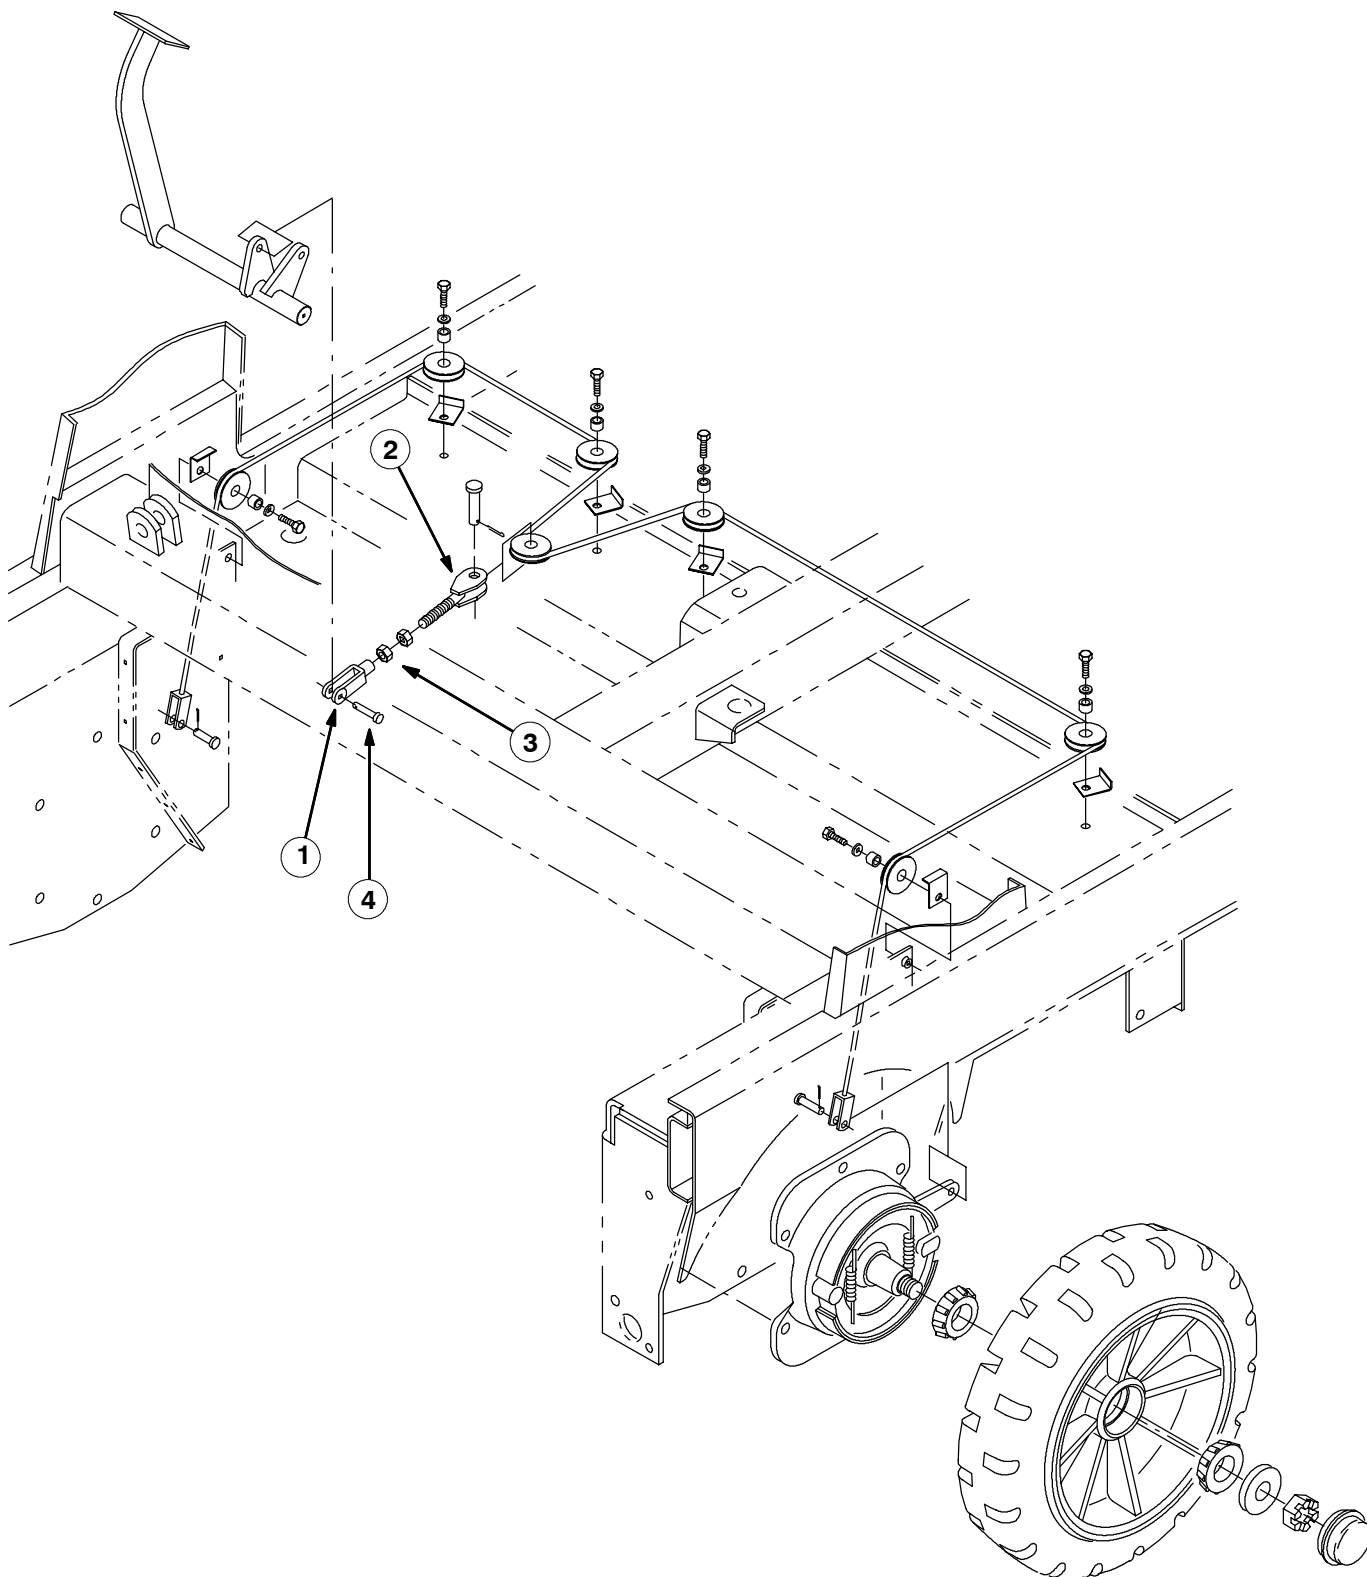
BRAKE CABLE CONNECTOR INSTALLATION
